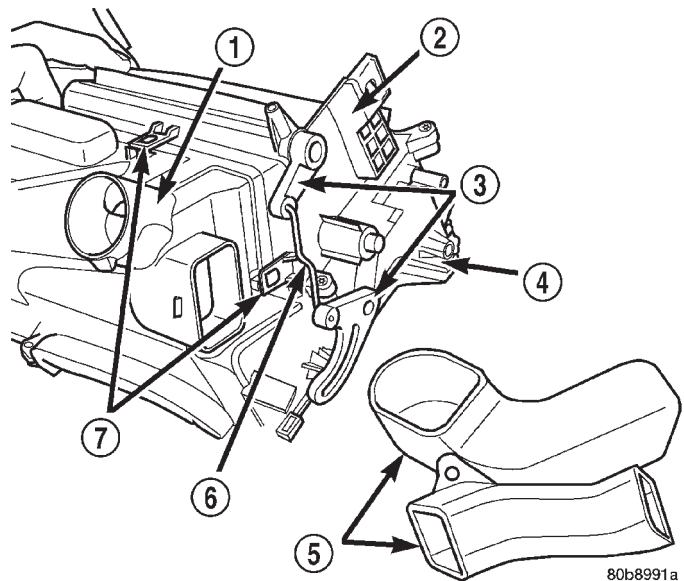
HEAT/DEFROST DOOR DUCTS, AND ADAPTER
